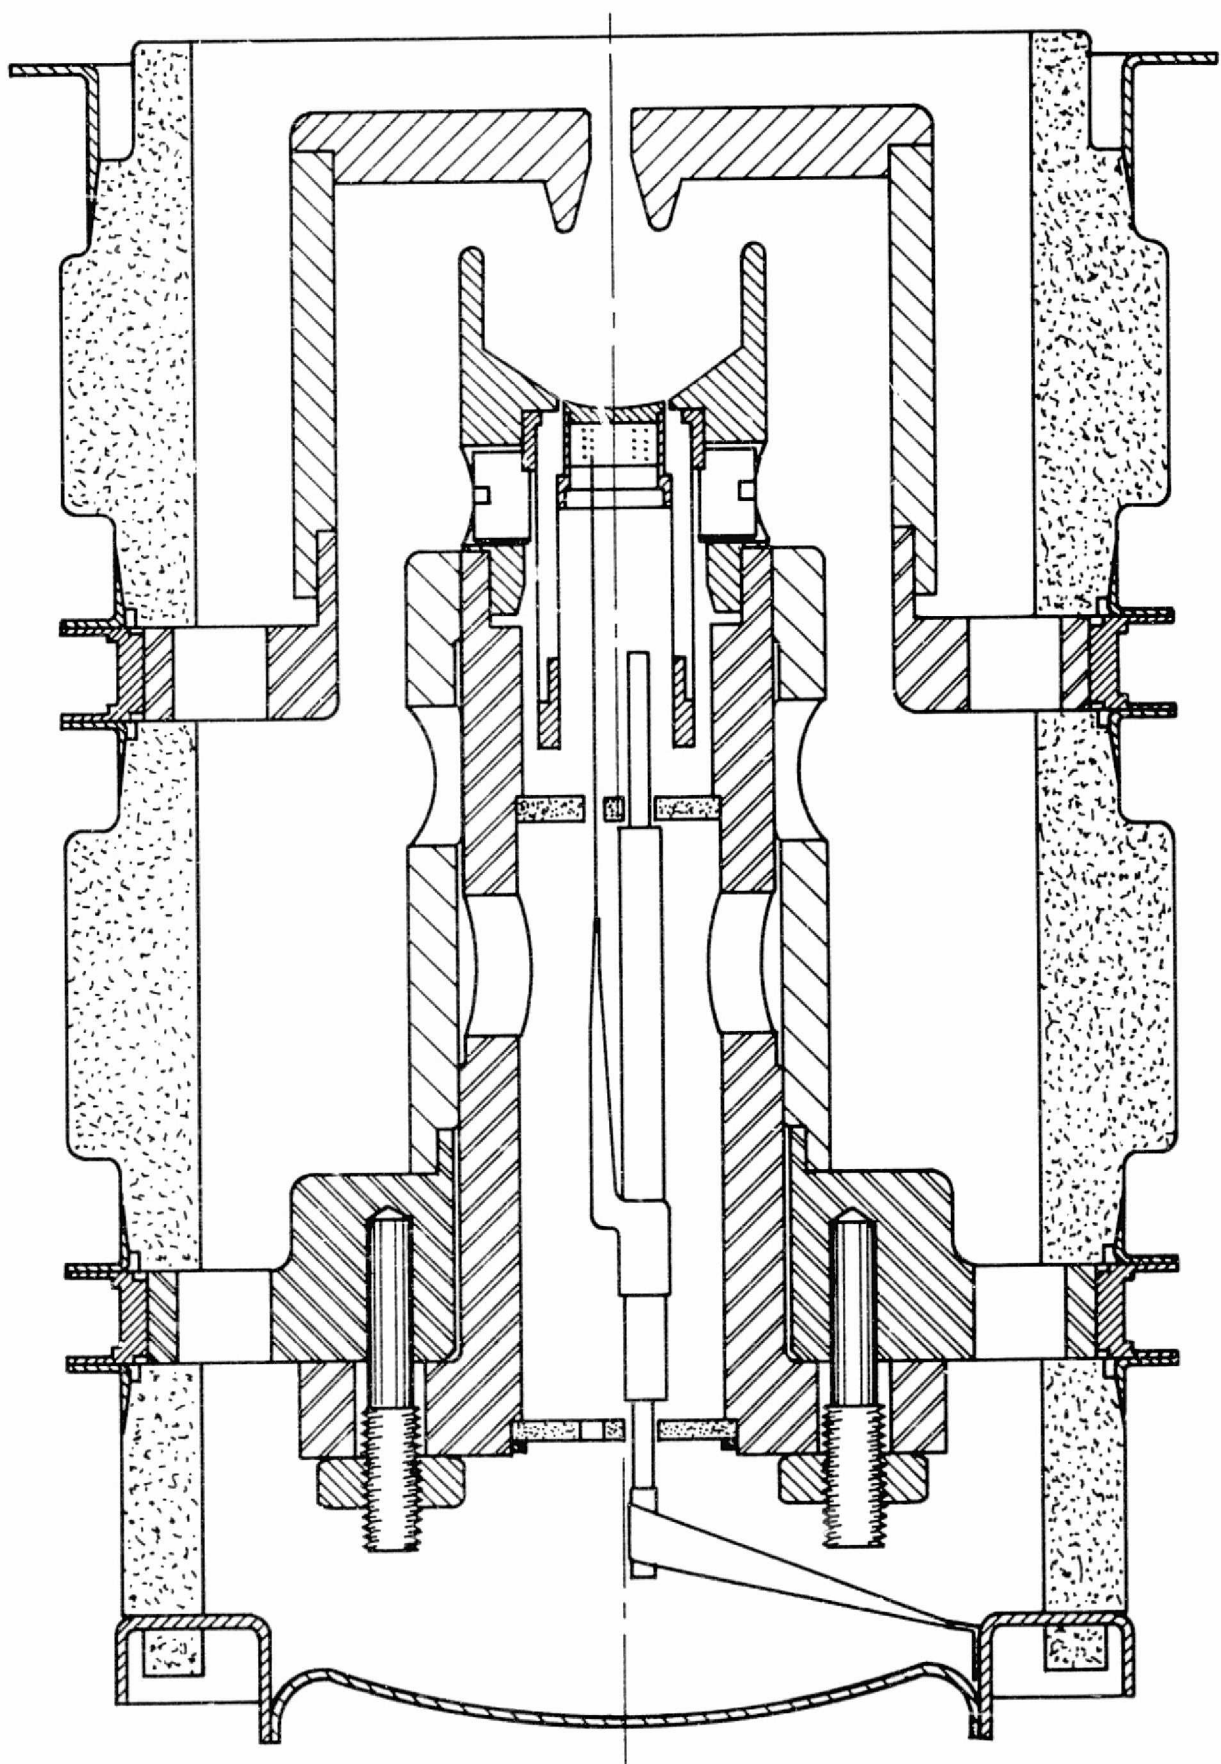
REPLACEABLE GUN ASSEMBLY
